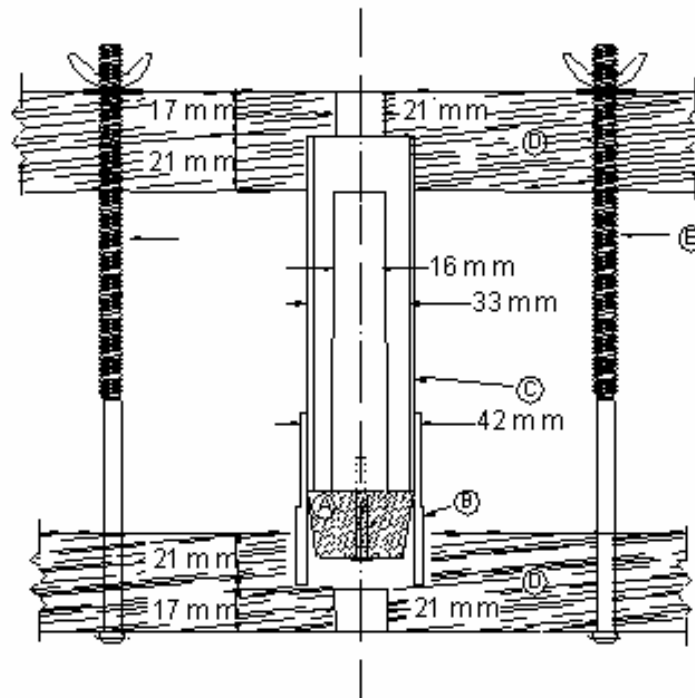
Cross Section of the Mold for Mortar-Wrapped Specimen
